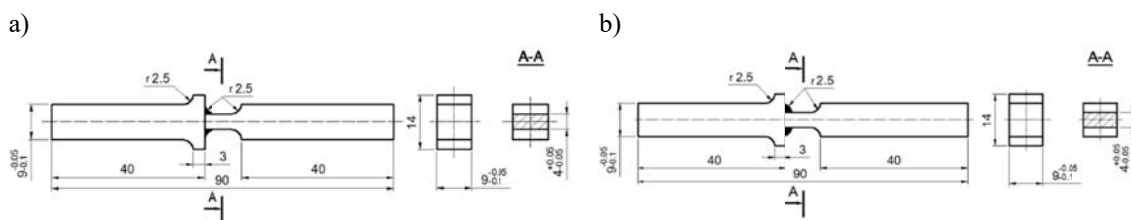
Shapes and dimensions of specimens with: a) concave welds, b) convex welds, dimensions in mm.
